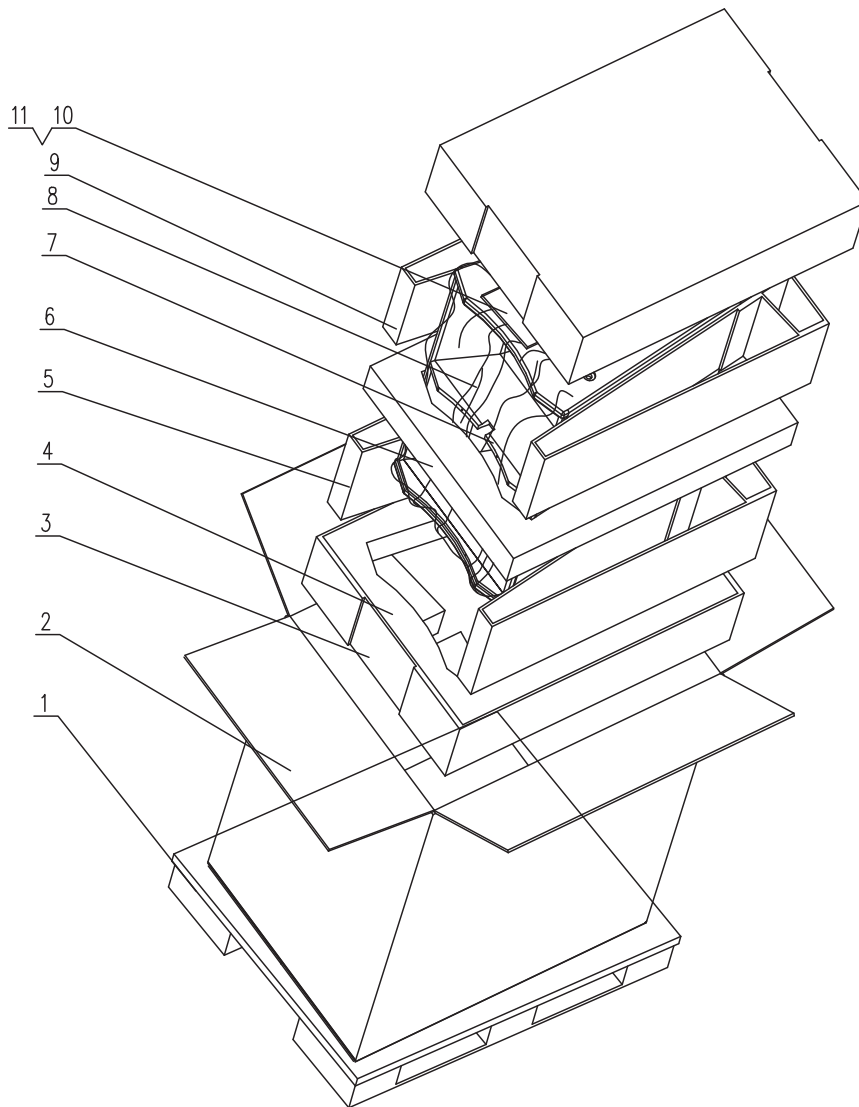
Panaray LT 4402 WR Loudspeaker Packaging View
